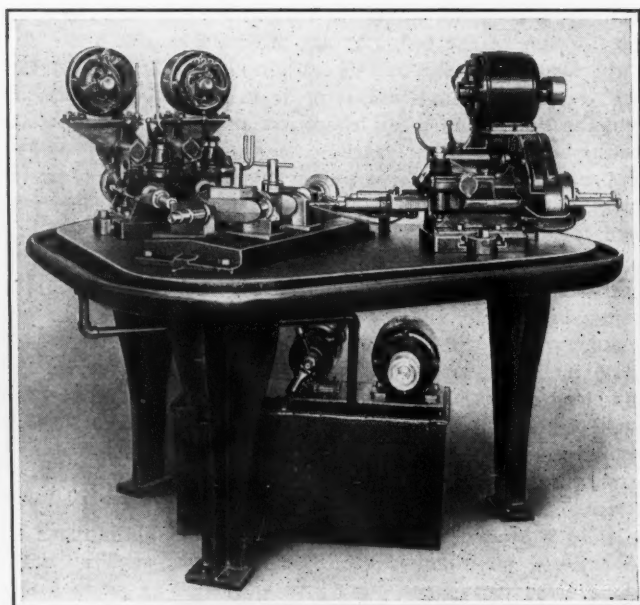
Machine built by Edwin Harrington, Son & Co., Inc., for Use in drilling Oil-holes in Crankshafts
